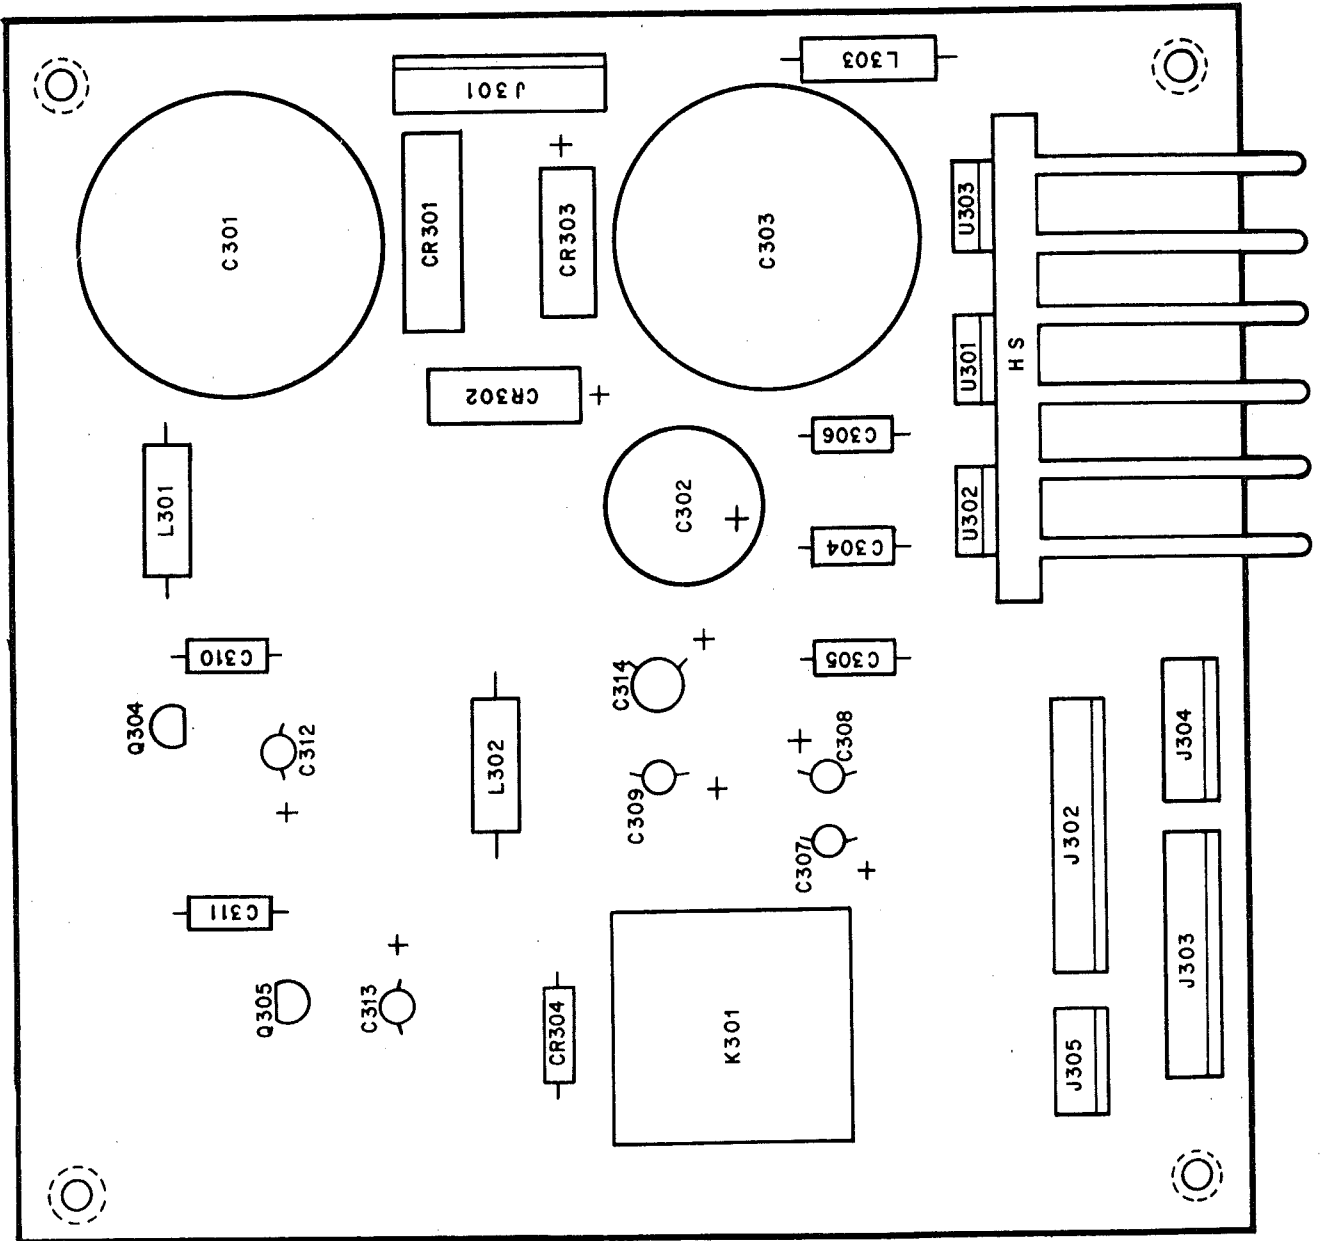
POWER SUPPLY BOARD ASSY
